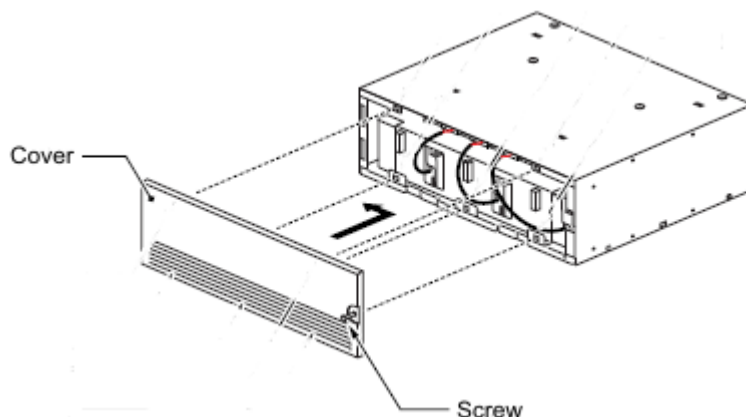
Install CHS LARGE BATT BOX Front Cover
